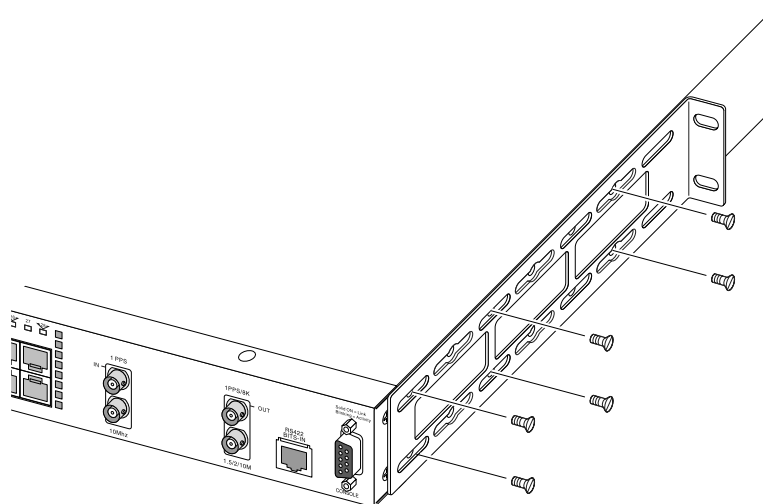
Rack-mounting Bracket for Mid-Mount Installation
